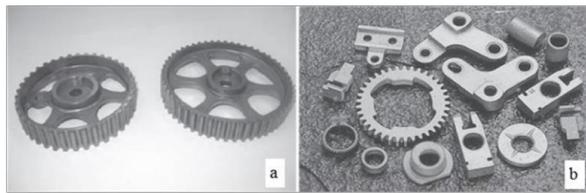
Parts manufactured by PSM: a) Distribution pulleys, b) Fuel pump parts [56].
